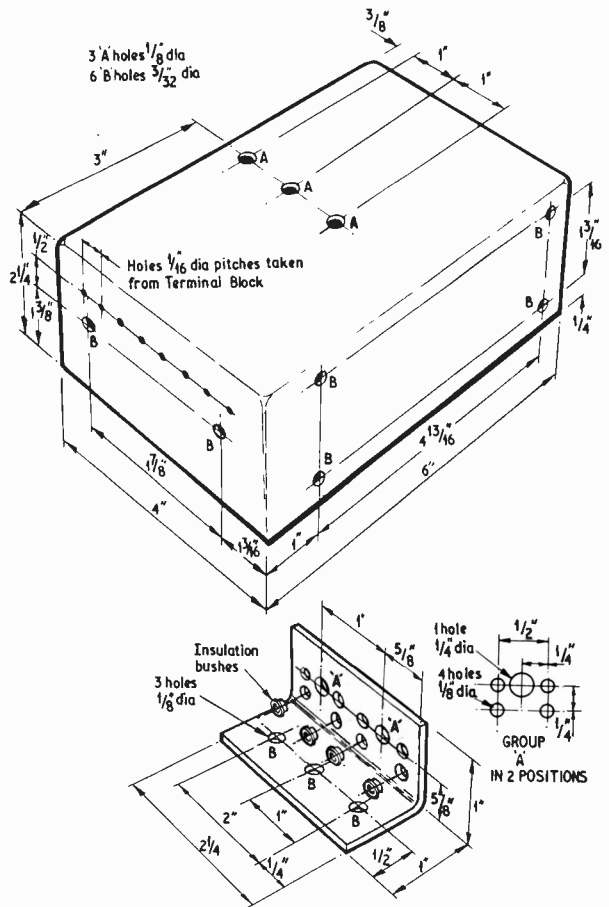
Chassis and relay mounting bracket showing details of drilling
